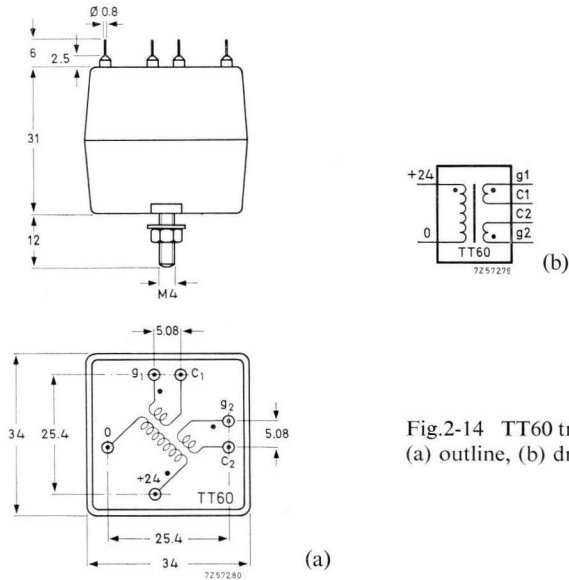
TT60 trigger transformer: (a) outline, (b) drawing symbol.
